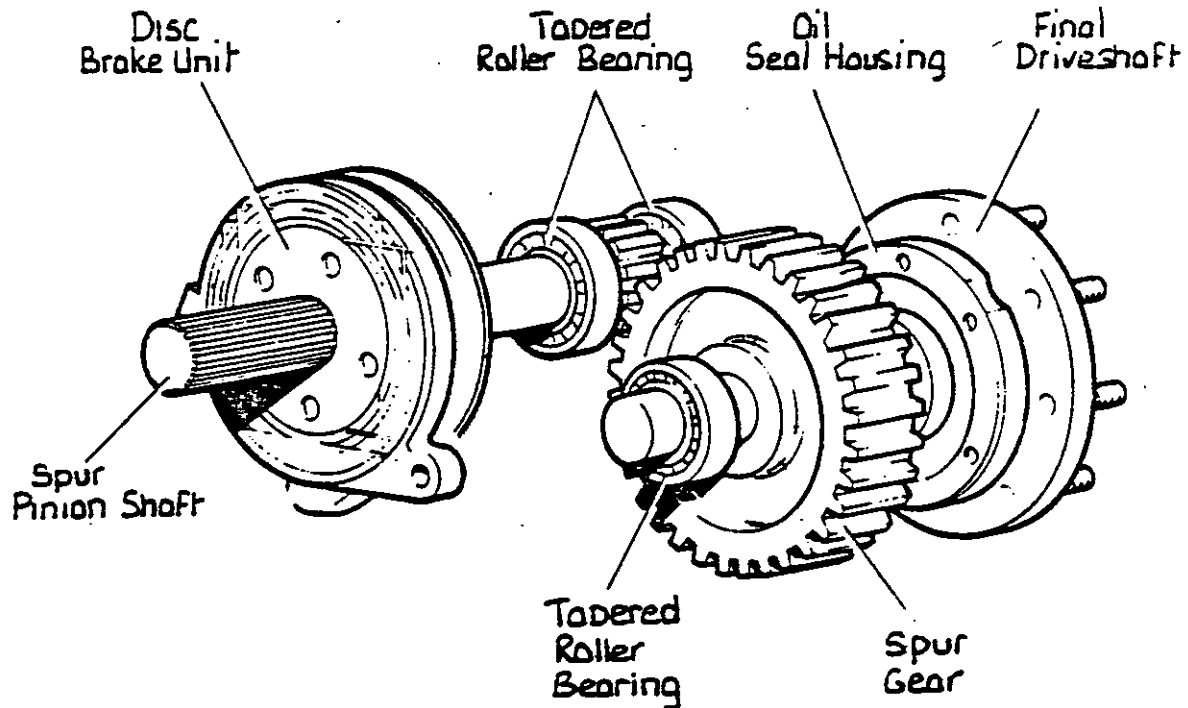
FINAL DRIVE REDUCTION GEARS
